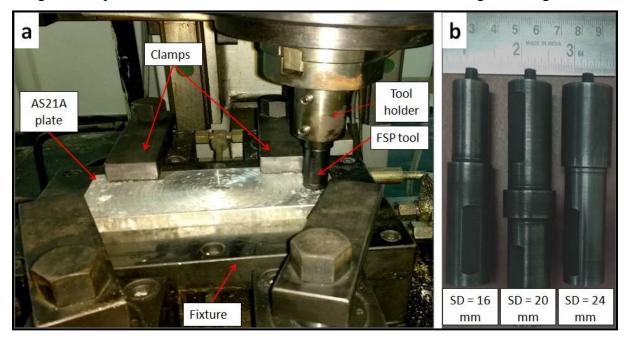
(a) Processing zone in FSW machine; (b) FSP tools
